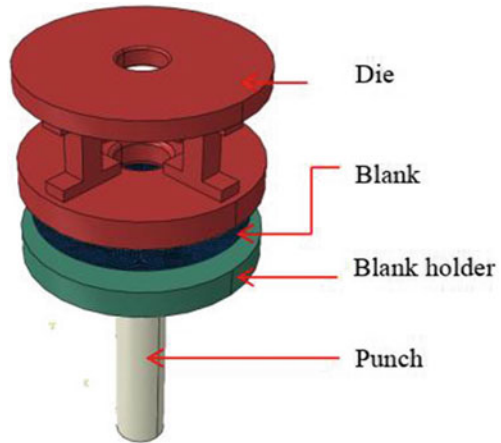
Test setup for the deep drawing process: a die; b force blank holder; c punch
